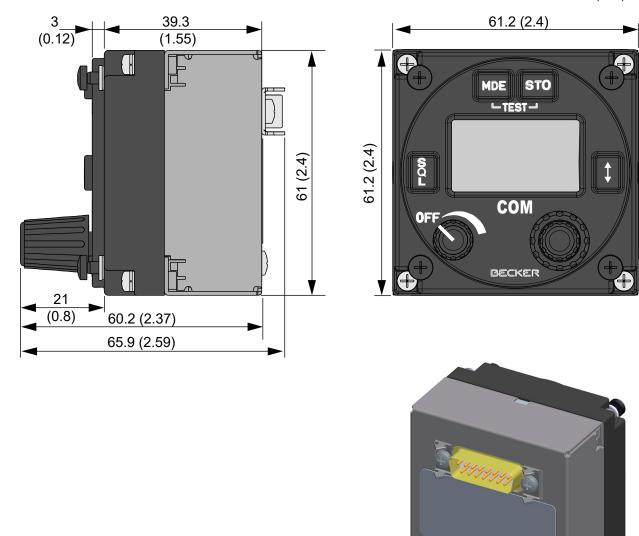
Dimensions - RCU6512-(1XX), RCU6512-(2XX)
